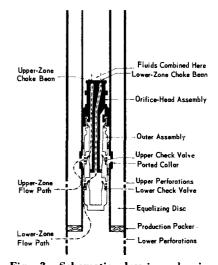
Schematic drawing showing operation of multiple-completion choke assembly.
